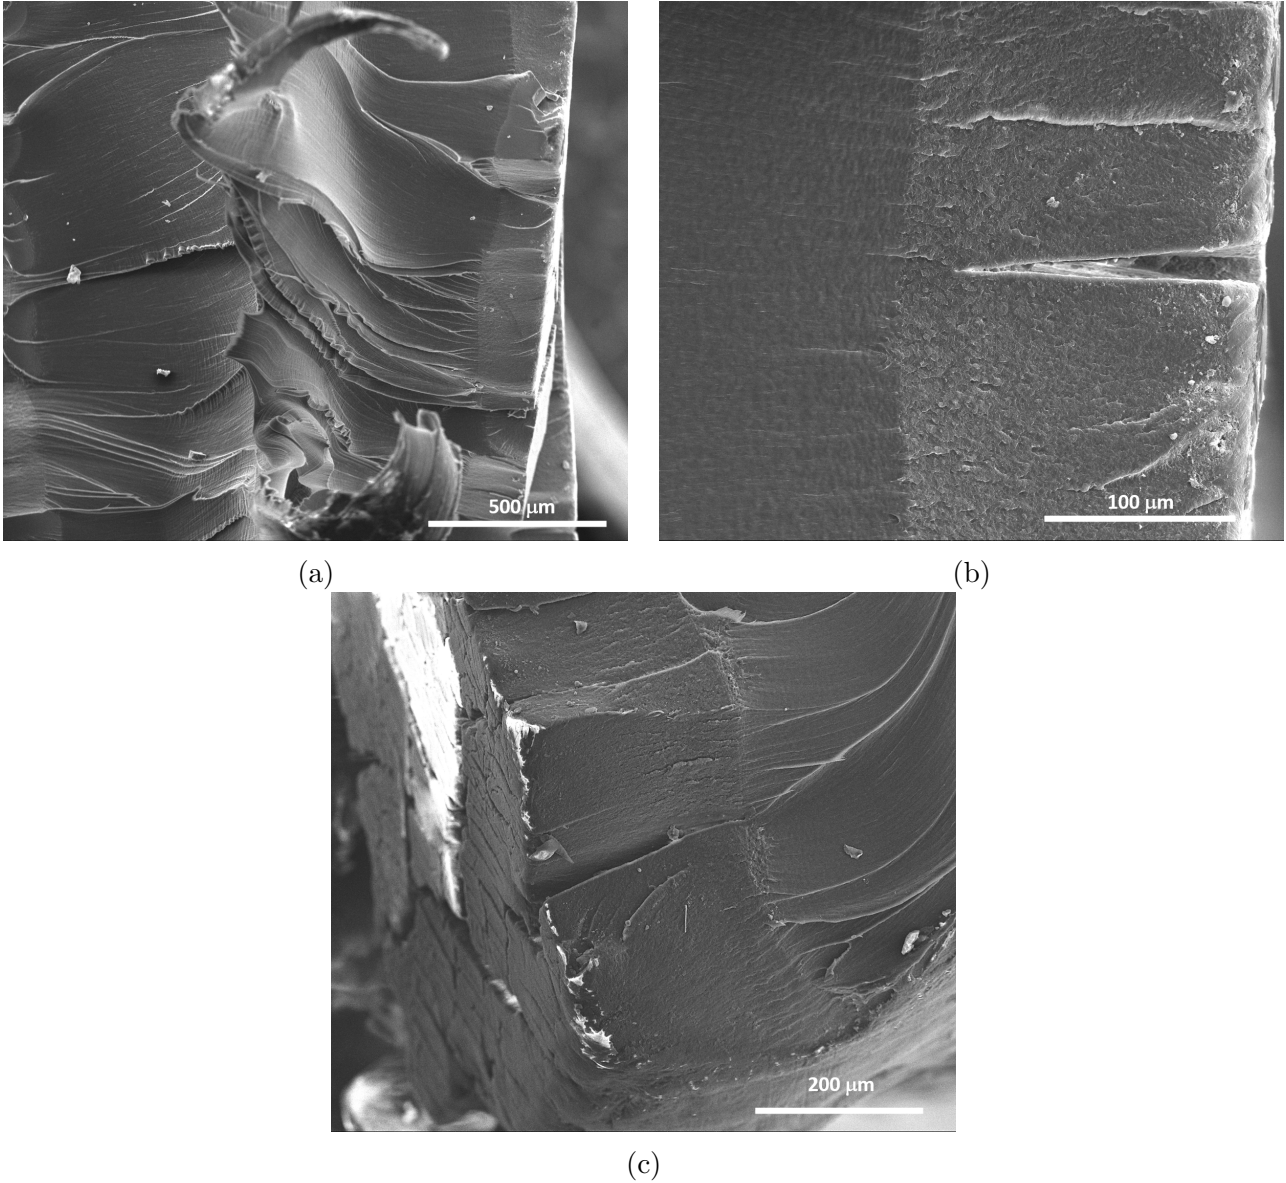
(a) Fracture surface of LDPE plate after 240 h of HUV aging. (b) An oxidation layer of $\sim 180 \mu\text{m}$ can clearly be observed in the fracture surface. (c) Detail showing how cracks originated in the surface are arrested within the oxidation layer.
